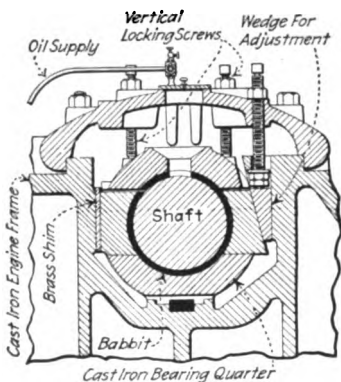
Showing low-friction—babbitt—metal inserted in main bearing. (Eric Ball Engine Co.)
